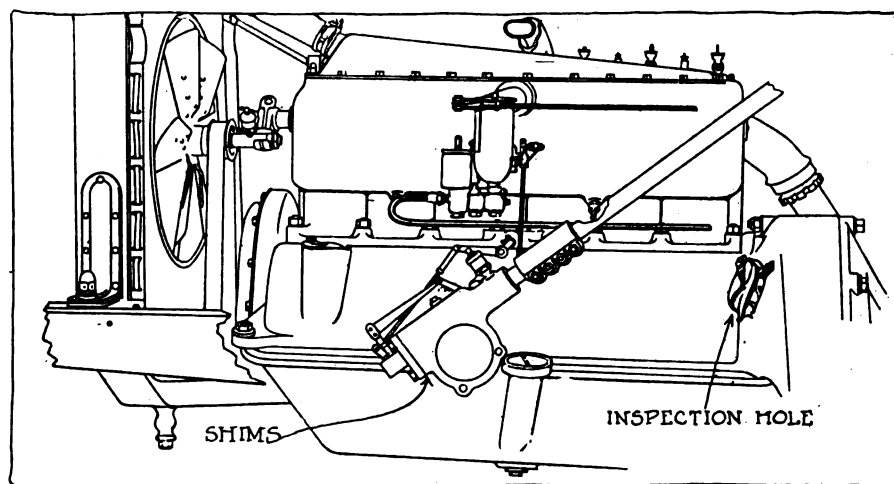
Left side of Hudson motor, showing carburetor, steering gear and inspection hole through which the ignition timing may be checked up. Cylinder No. 1 fires in advance position when the mark A on the flywheel is under the pointer on the crankcase. At this point the piston is $\frac{1}{2}$ inch from top dead center. End play in the steering gear is eliminated by taking off the cover plate to the bottom of the steering gear and removing as many shims as required
